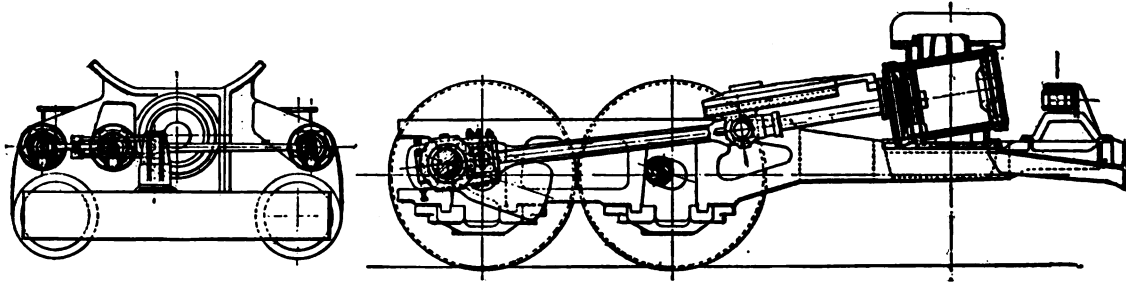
At the left is a front view of the valve lever arrangement and at the right is the inclined middle cylinder with its guide and crosshead
